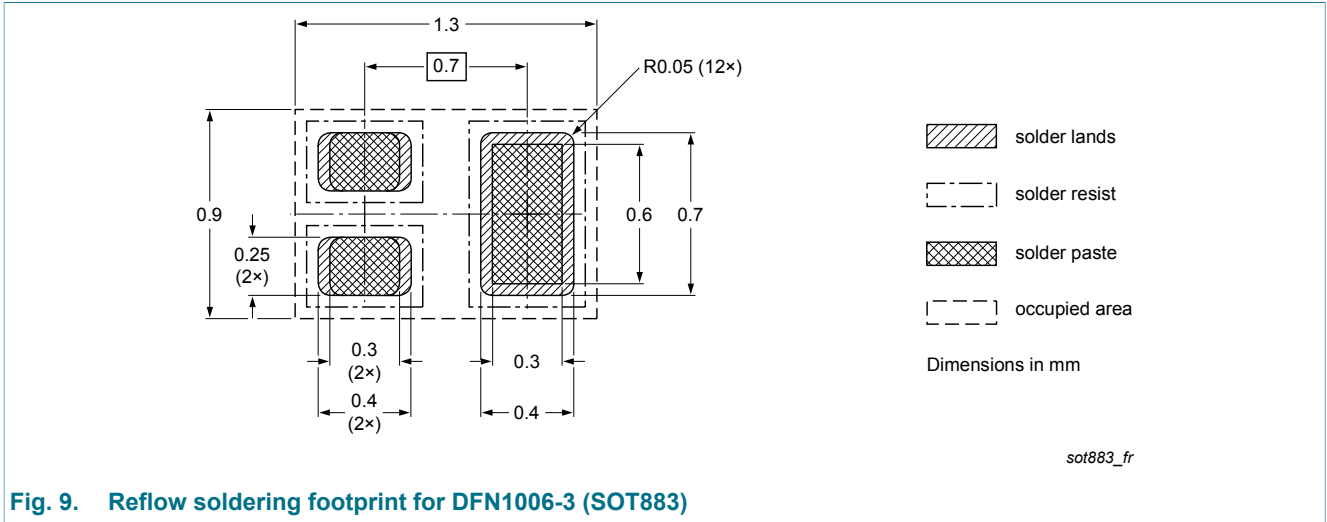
Reflow soldering footprint for DFN1006-3 (SOT883)
